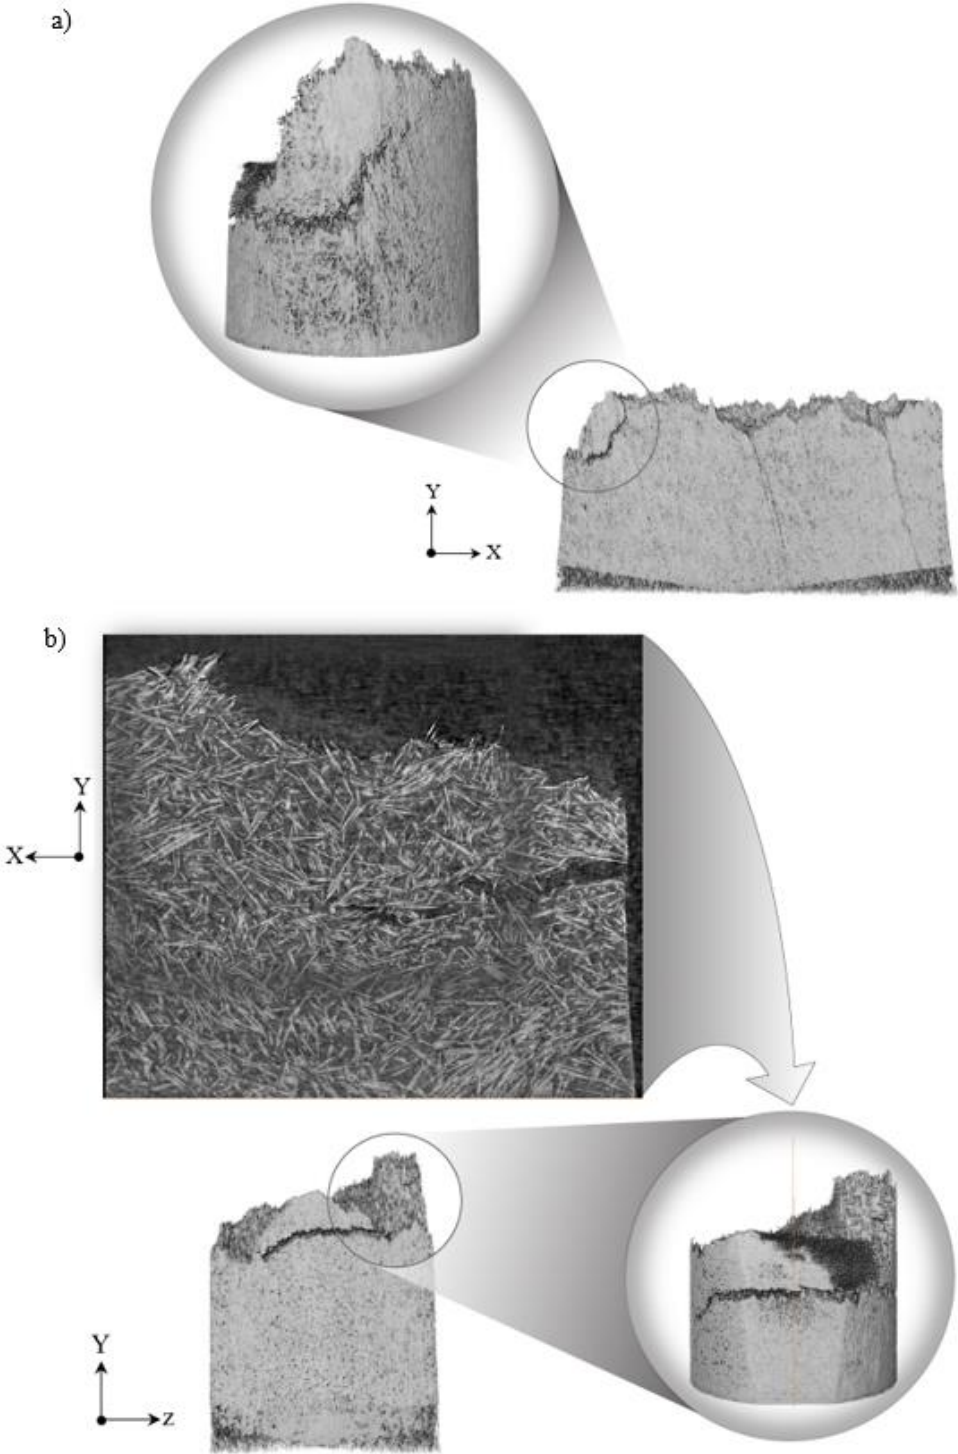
Scanned fracture surface of a fatigue 0° specimen tested at 50° C. a) front view, b) lateral view
